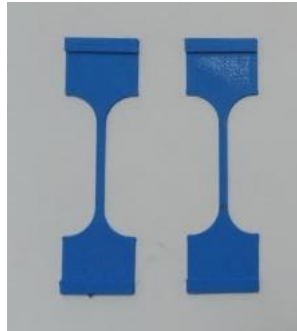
Thin dumbbell-shaped PLA specimen used for tensile testing in the MiTTM
